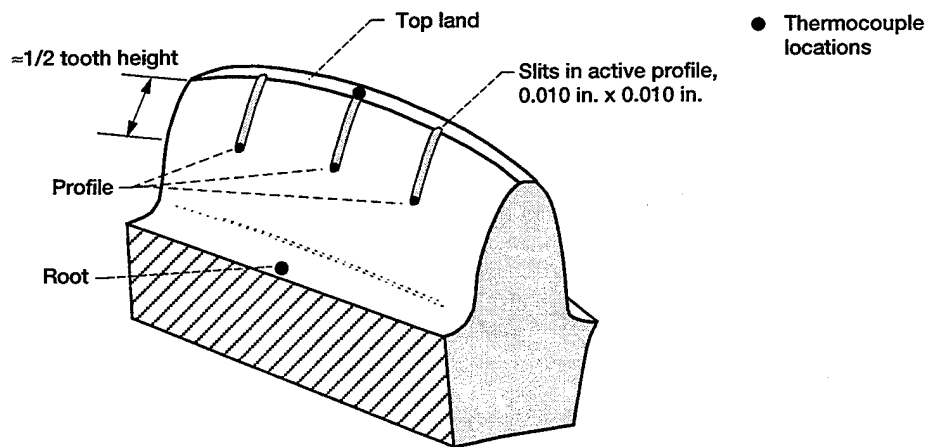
Sketch of active profile thermocouples. Slits were electro-discharge machined in hardened gear surface.
